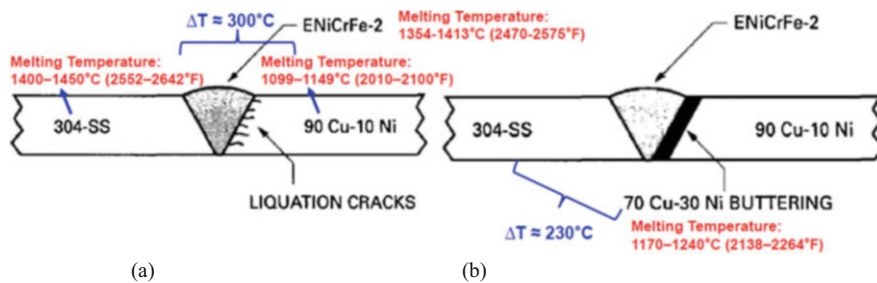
Buttering Welding Technique 1 to avoid liquation cracking. (a) Liquation cracking. (b) Use of buttering to avoid liquation cracking. (Source: AWS clad and dissimilar metals, Chapter 6, 1998)
